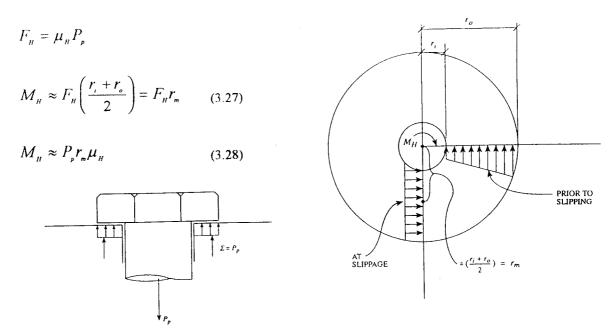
Forces and Torque to Overcome Bolt Head Friction.
